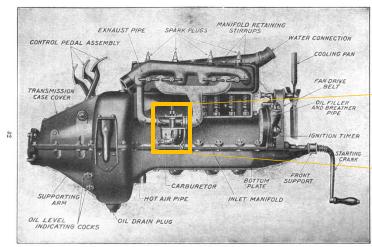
Valve Side of the Ford Model T Unit Power Plant Showing Manifolds, Carburetor and Interior of One of the Valve Spring Chambers.
